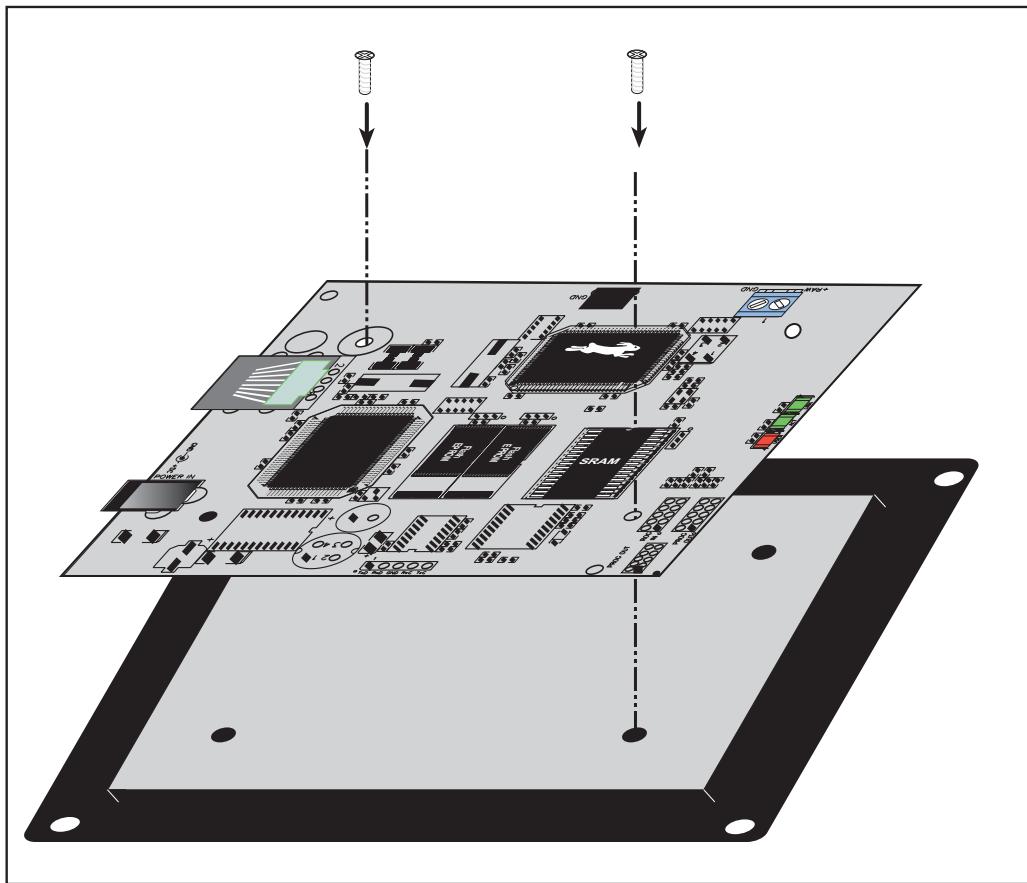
Attach RabbitLink Board to Plastic Enclosure Base
